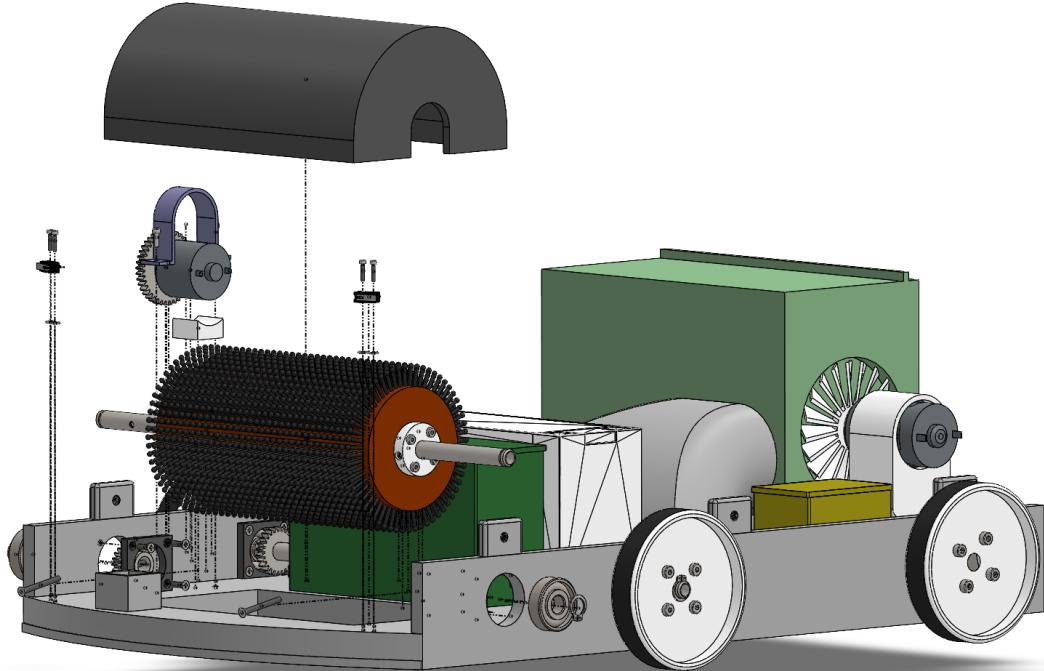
Roller and Roller Motor Assembly with Base Plate
